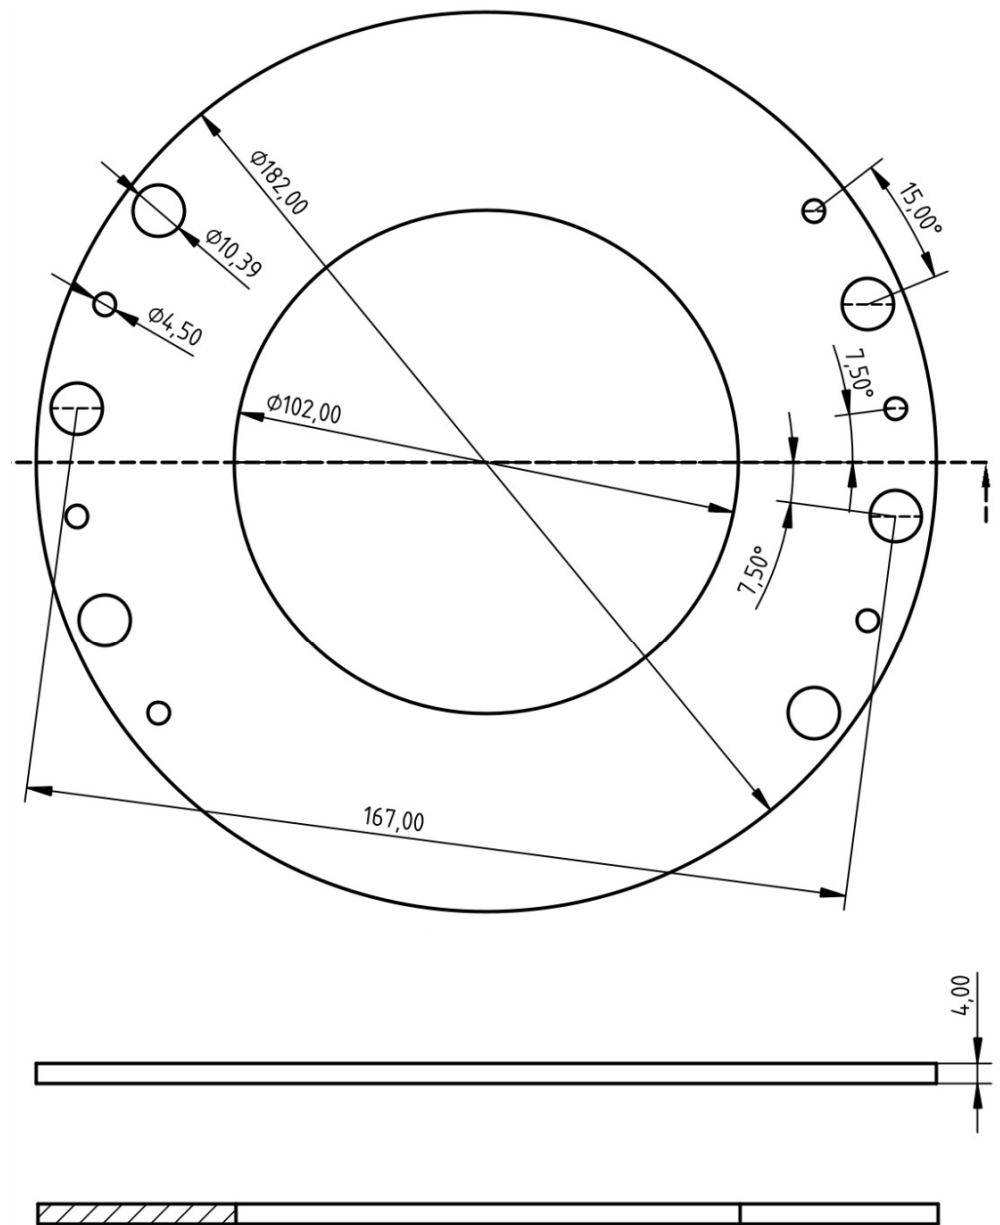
Technical drawing of the upper casting frame in the biofilm module in top view (top), side view (middle), and cross-section (bottom). Dimensions in millimeters and degrees.
